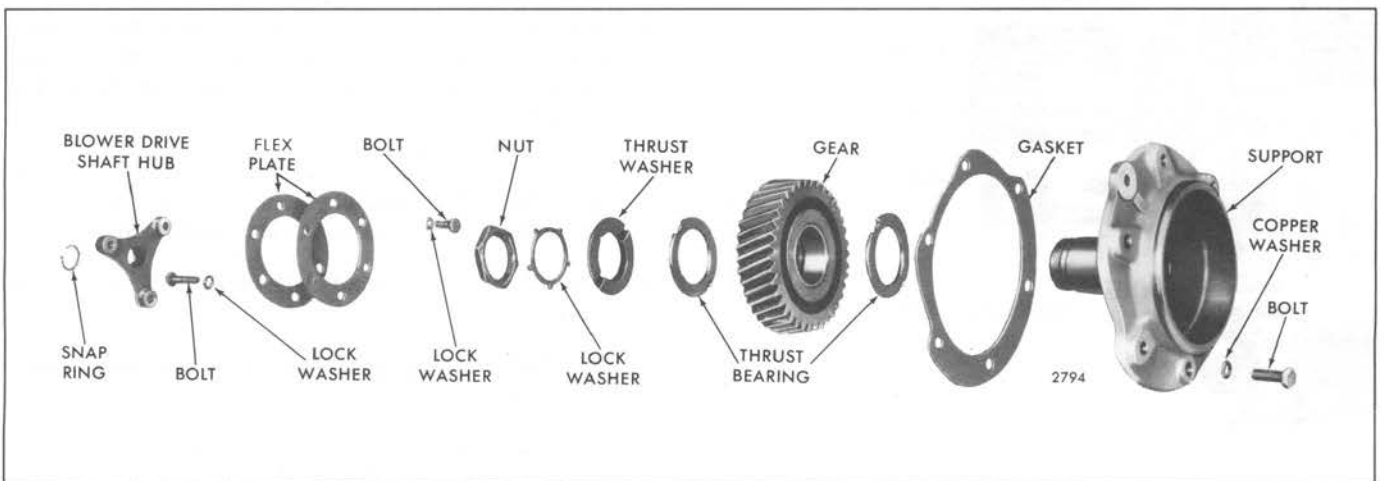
Rear Hub, Blower Drive Gear, Support Assembly and Relative Location of Parts
